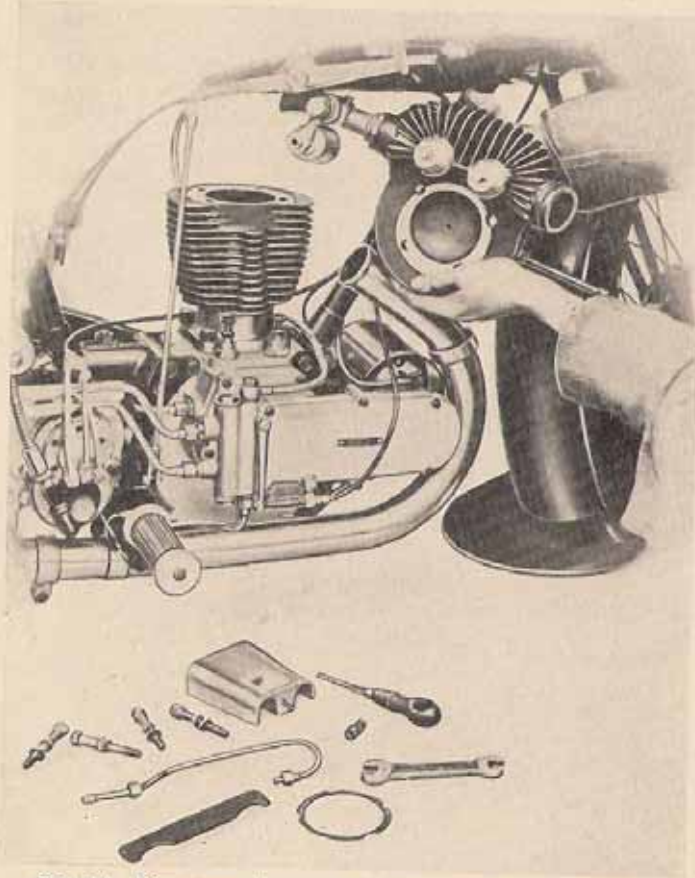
REMOVING CYLINDER HEAD OF THE S.V. ENGINE
